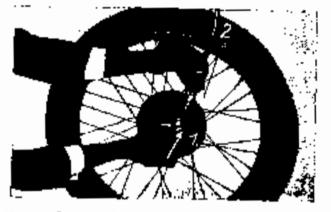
Removing the front wheel; discontincting the mileage Undicator cable. 1 - Press button, 2 - Withdraw cable from seating.
